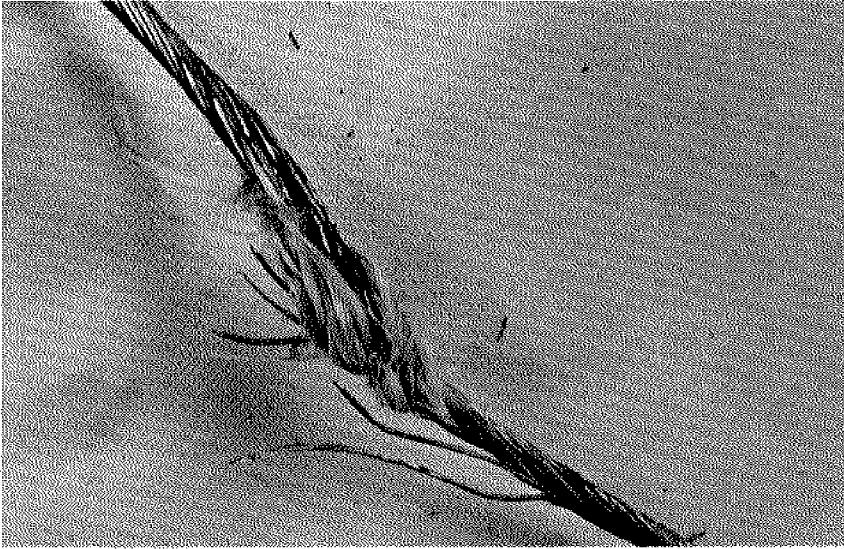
K-Core stainless steel wire showing typical failure. Wire has a central core of Kevlar fiber.
